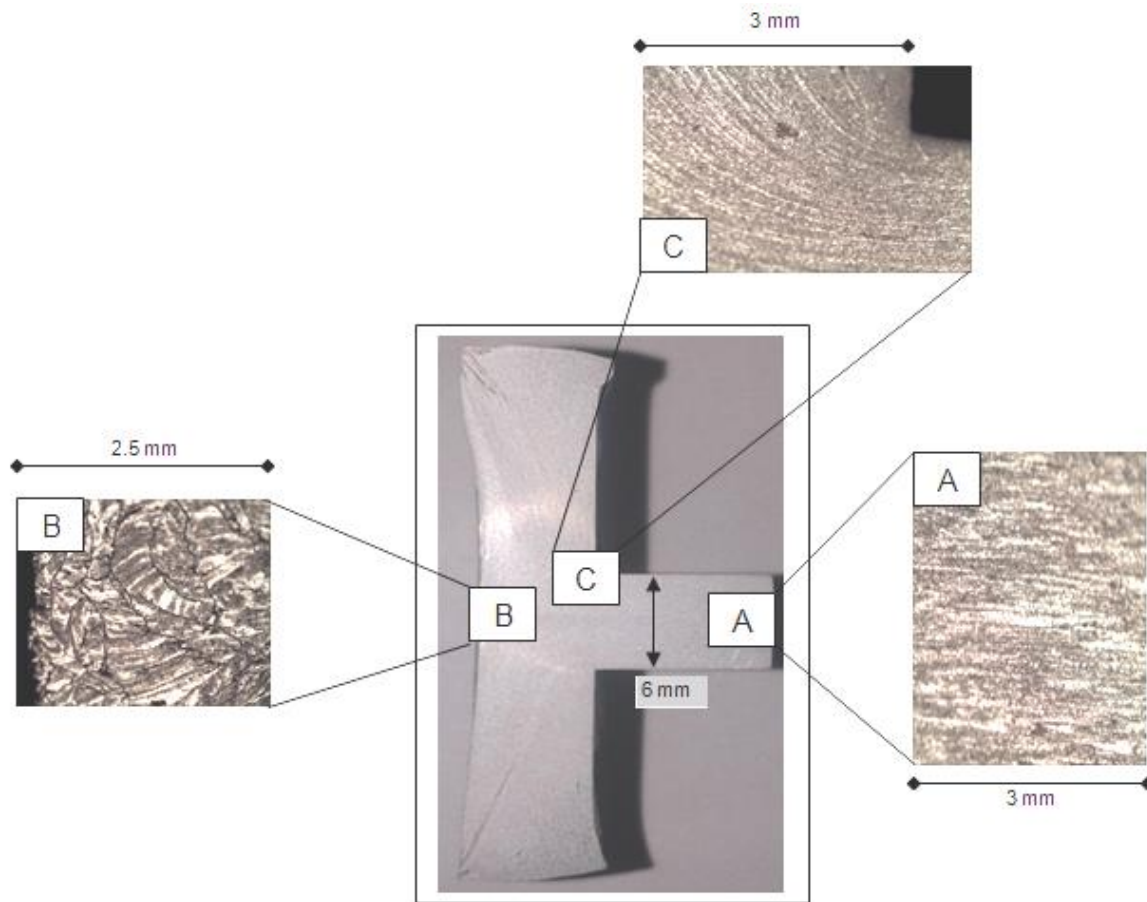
Images from the different location of the billet chips extrude billet 500°C & 3 hours extruded through the flat-face die.
